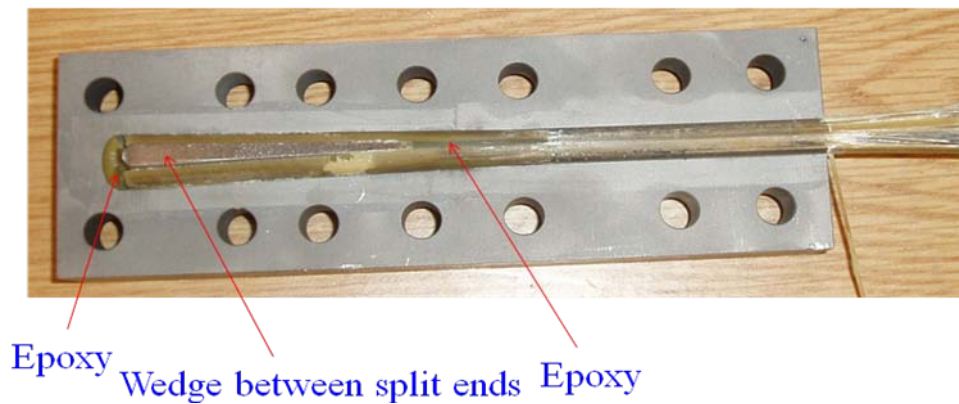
Carbon composite core with rectangular grip with wedge in split end grip tool
